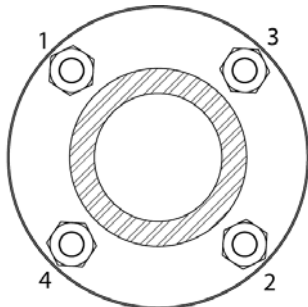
Bolt tightening sequence for flanges using 4 bolts
